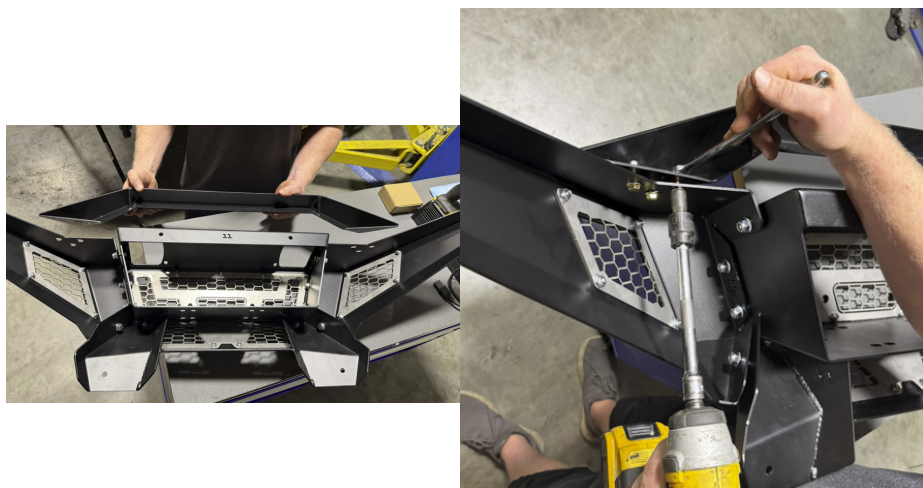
& FIG 12 - Fasten Bull Bar to the Driver and Passenger Wings
